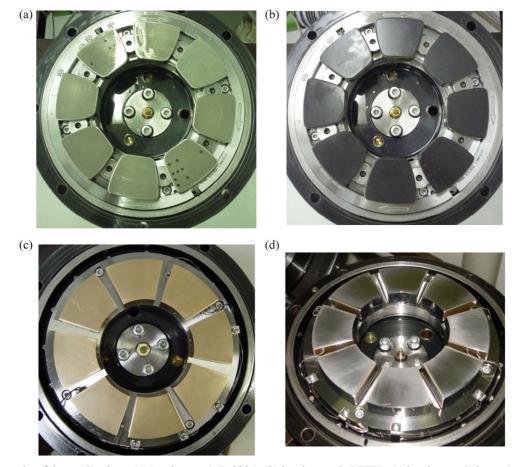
Photographs of the test bearings. (a) Bearing no. 1 (Babbitt); (b) bearing no. 2 (PEEK); (c) bearing no. 3 (bronze); and (d) bearing no. 4 (steel pad/DLC collar).
